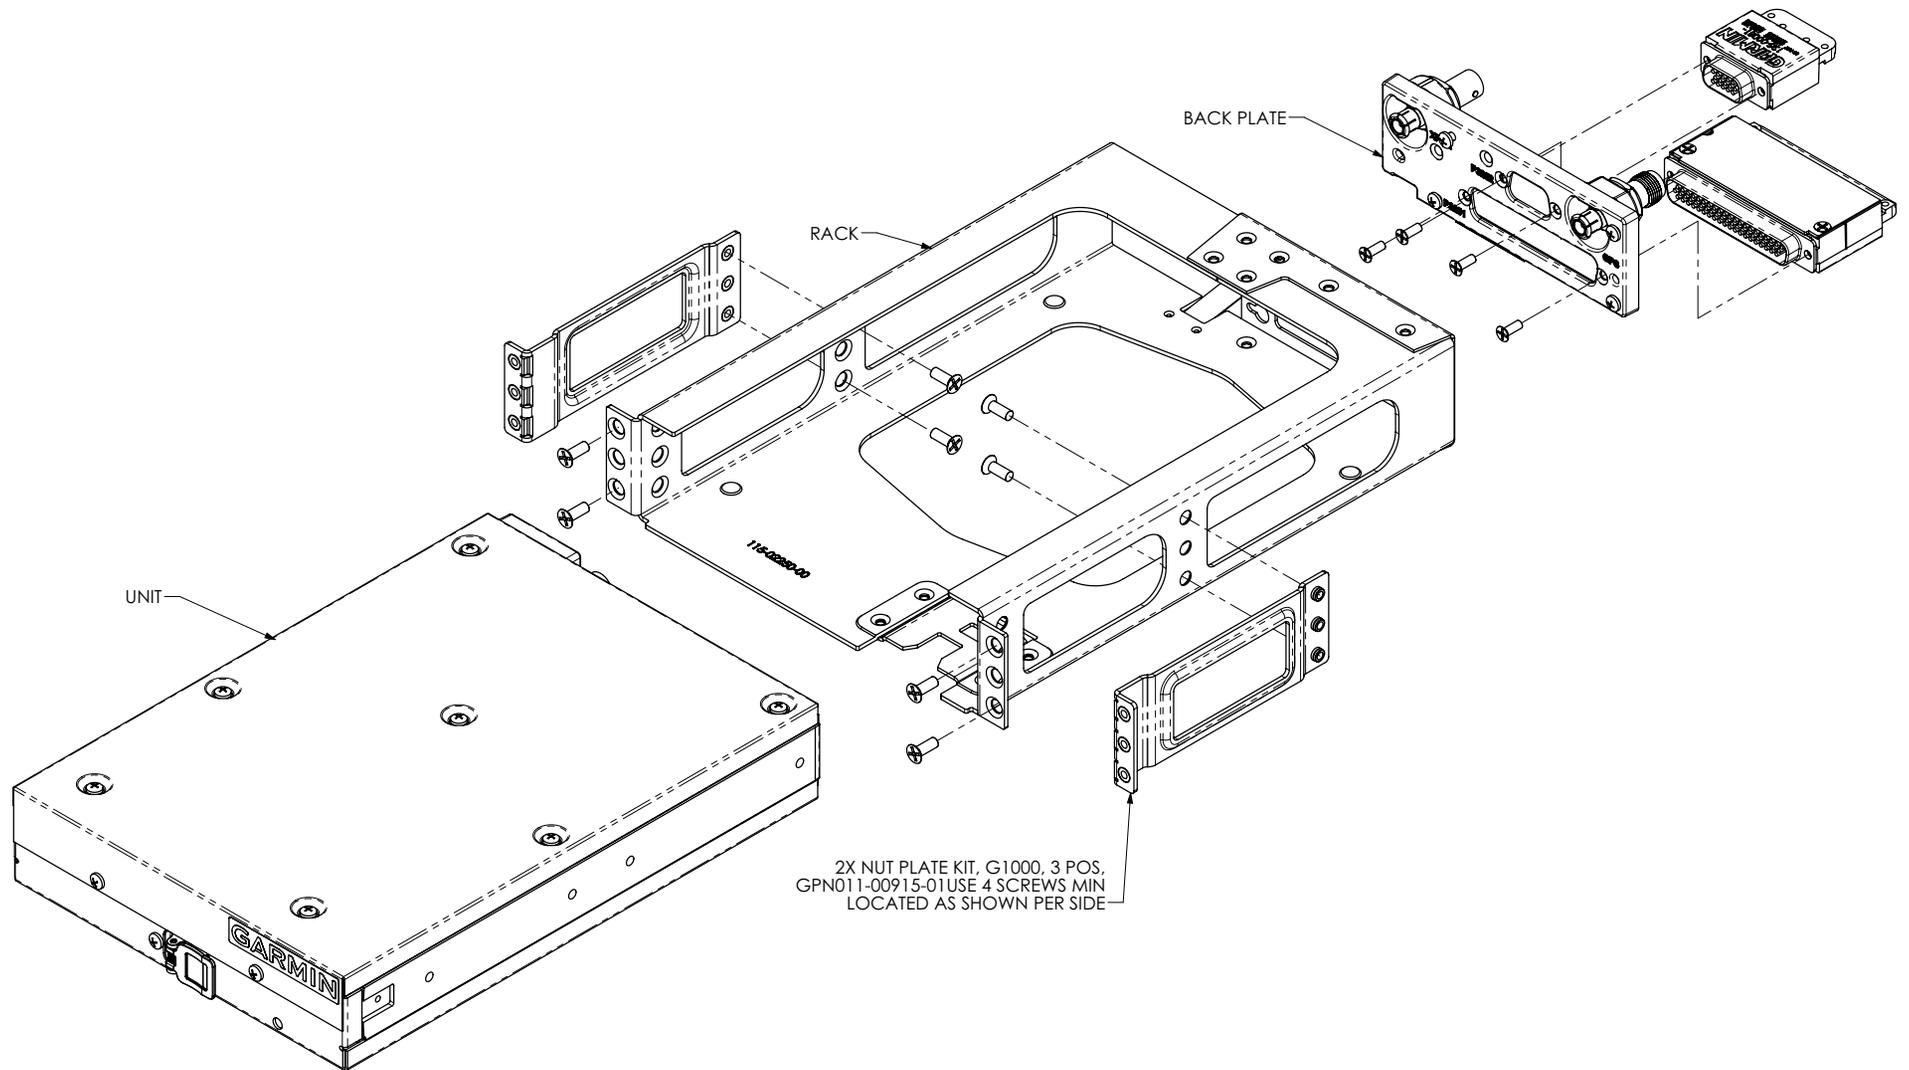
GTX 3X5 G1000 Remote Mount Assembly
